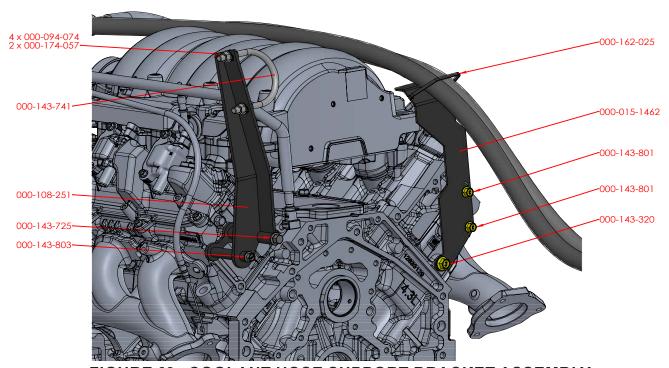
COOLANT HOSE SUPPORT BRACKET ASSEMBLY
